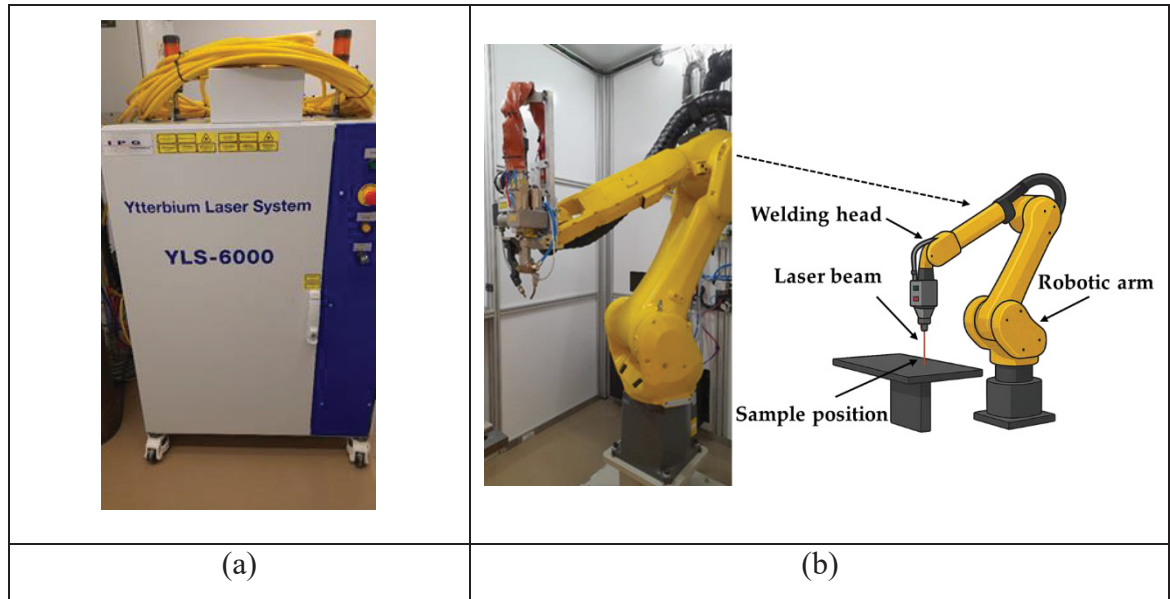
Experimental setup of the laser welding system: (a) laser source (IPG YLS-6000: Ytterbium Laser), (b) laser welding head and components
